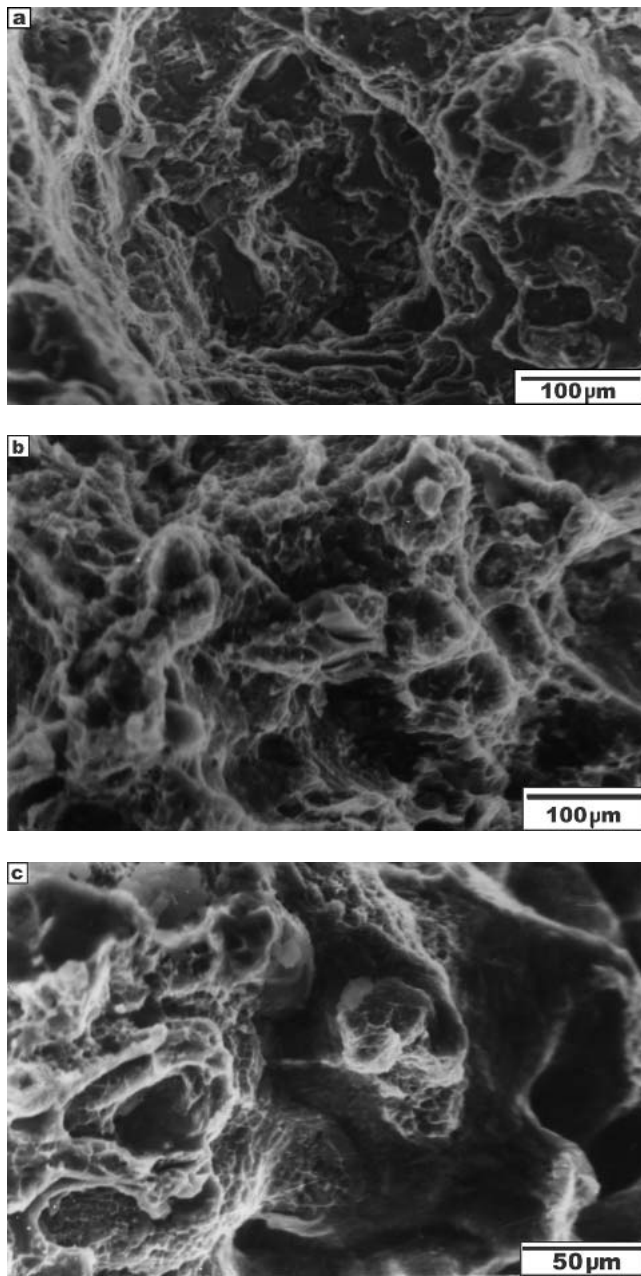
(a) shows the fractograph of fracture of as-cast matrix alloy, and Fig. 6(b) and (c) are fractographs depicting fracture of the as-cast composites (6%) for lower and higher
